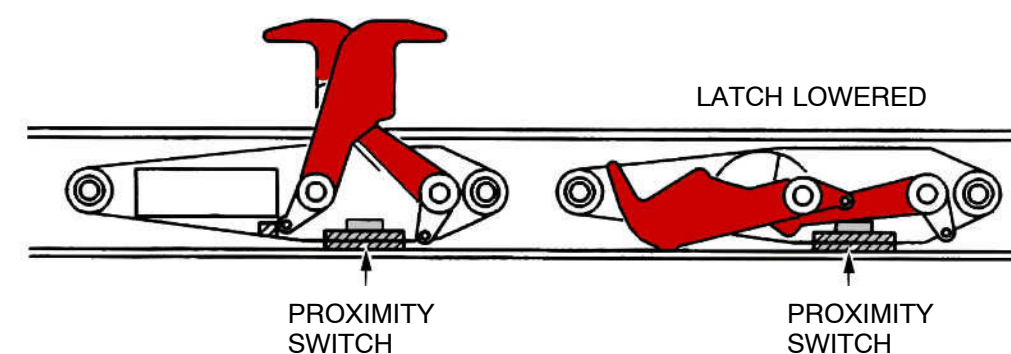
Offwing Escape Slide&amp;CLS Mechanism
